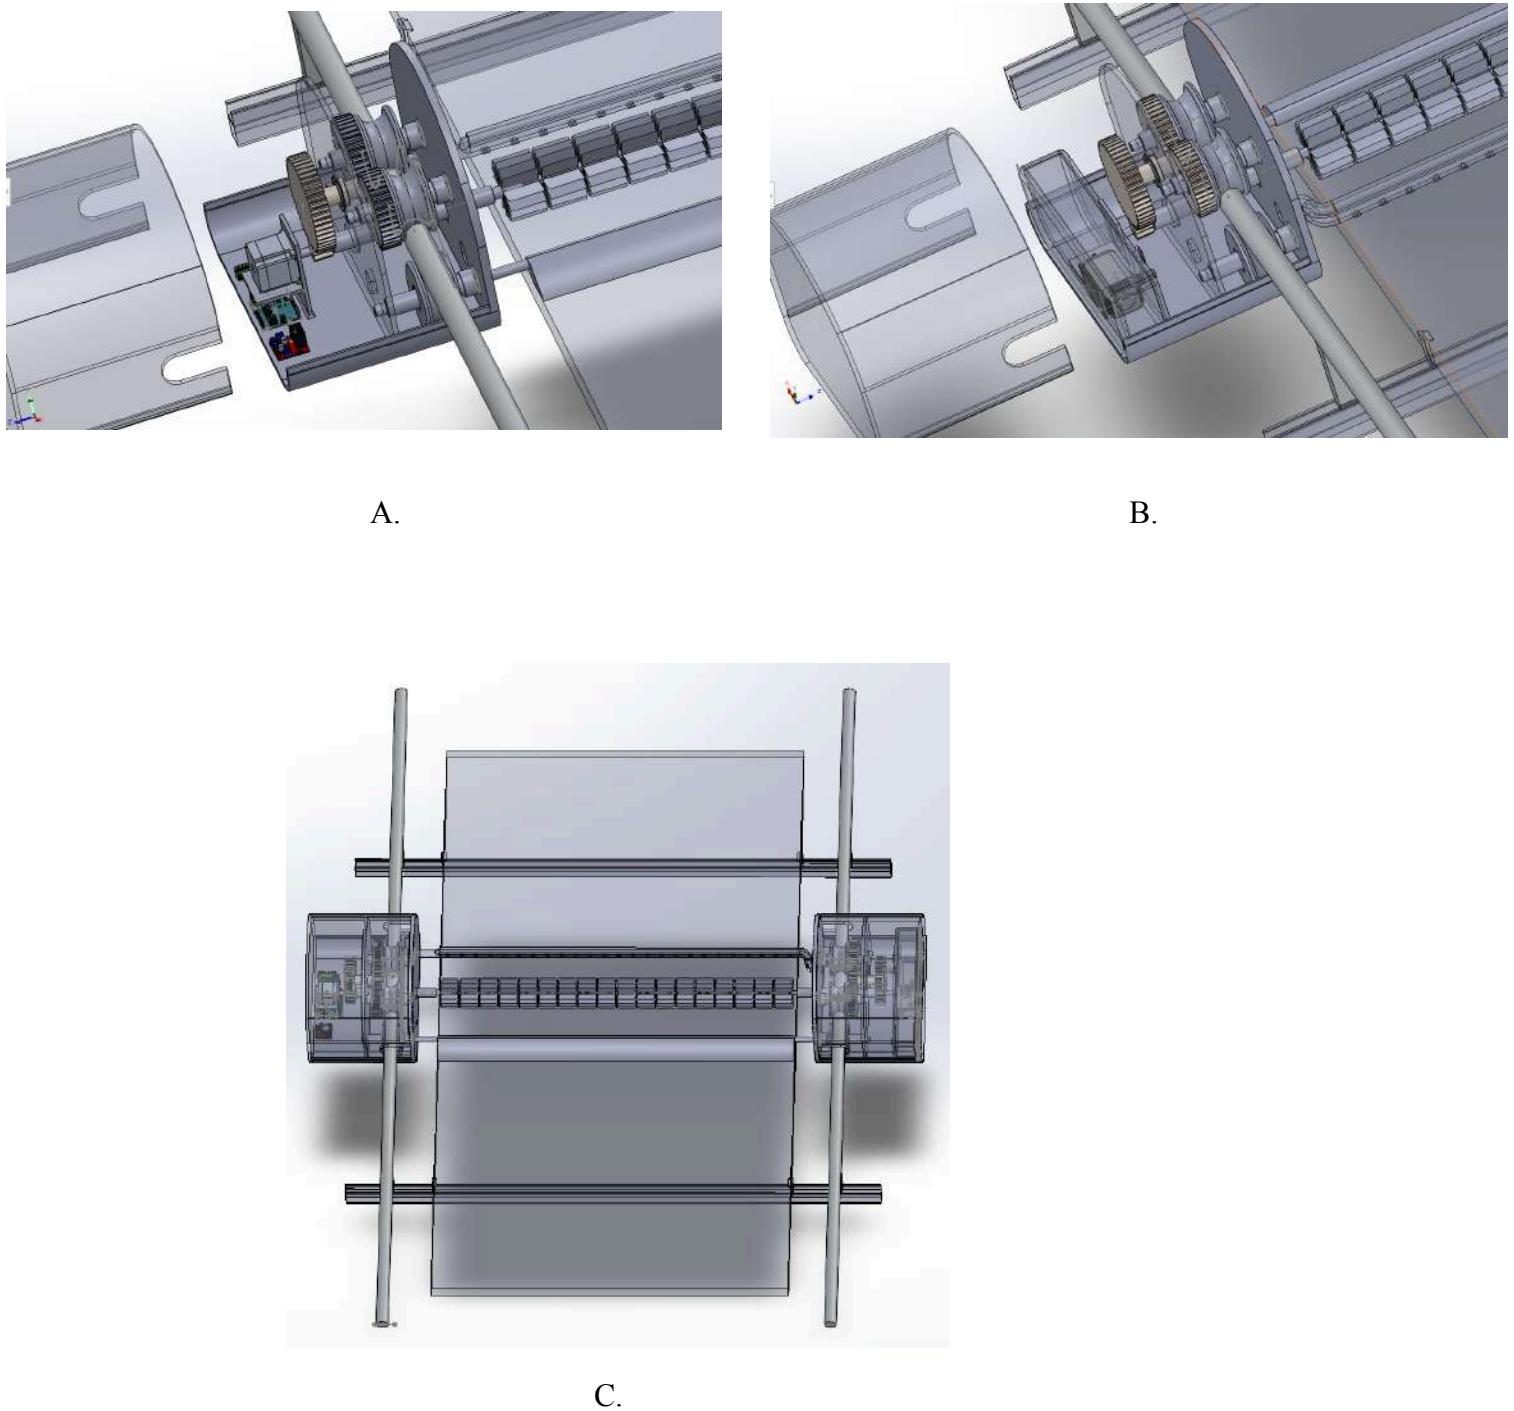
Assembled CAD Model. A) Motor side. B) Pump side. C) Assembled Device.
